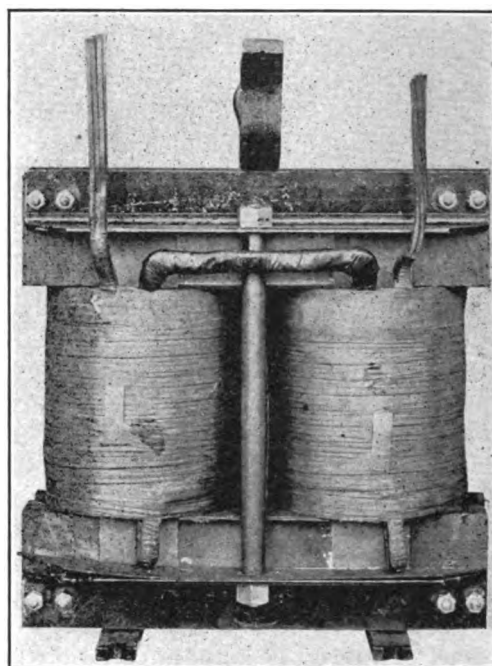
IRON-CORE REACTOR READY FOR ASSEMBLY IN TANK
